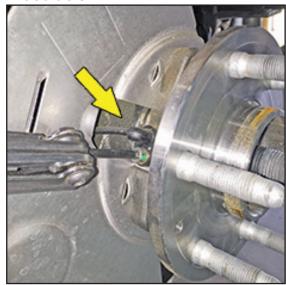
Unbolt and remove the ABS sensor from the hub assembly. {5mm allen}
